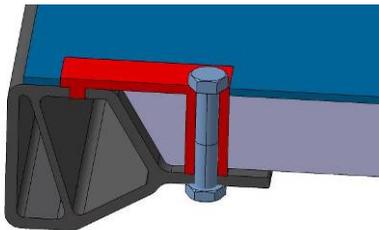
Cross-section of a possible connection of the sandwich with the honeycomb structure profiles in the floor area.[12]
